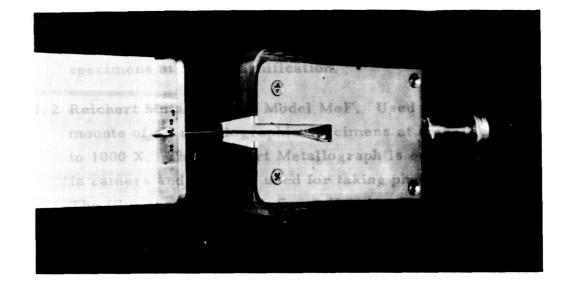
Solder joint 1.3.3 mounted in jaws of tensile tester ready for ultimate strength testing (R105341).
